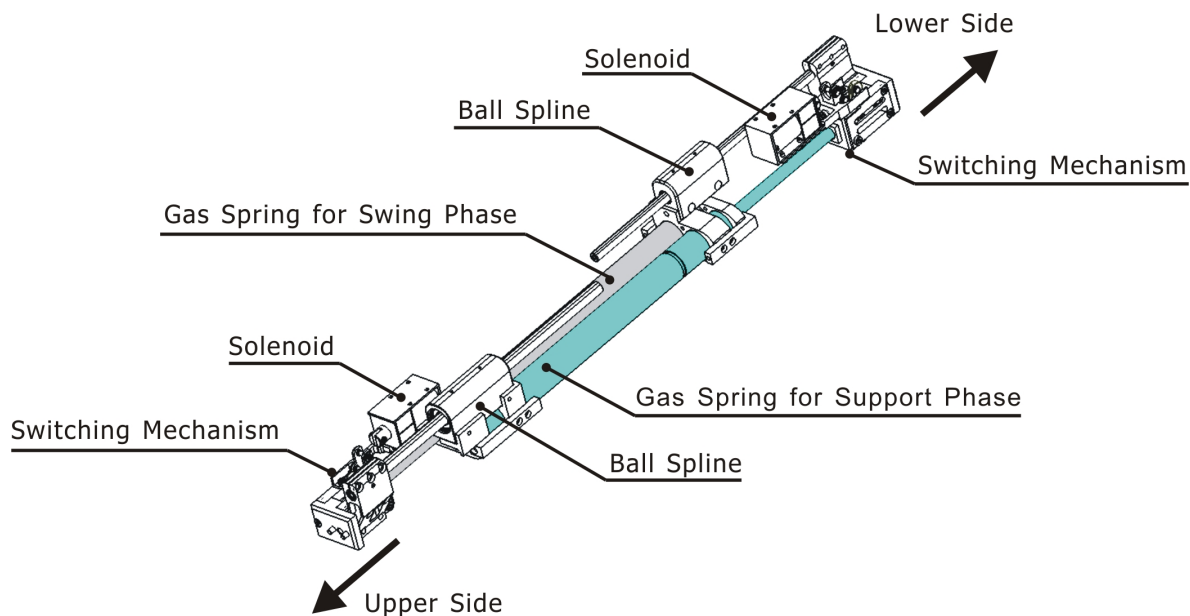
Outline of Support Torque Reduction Mechanism.
